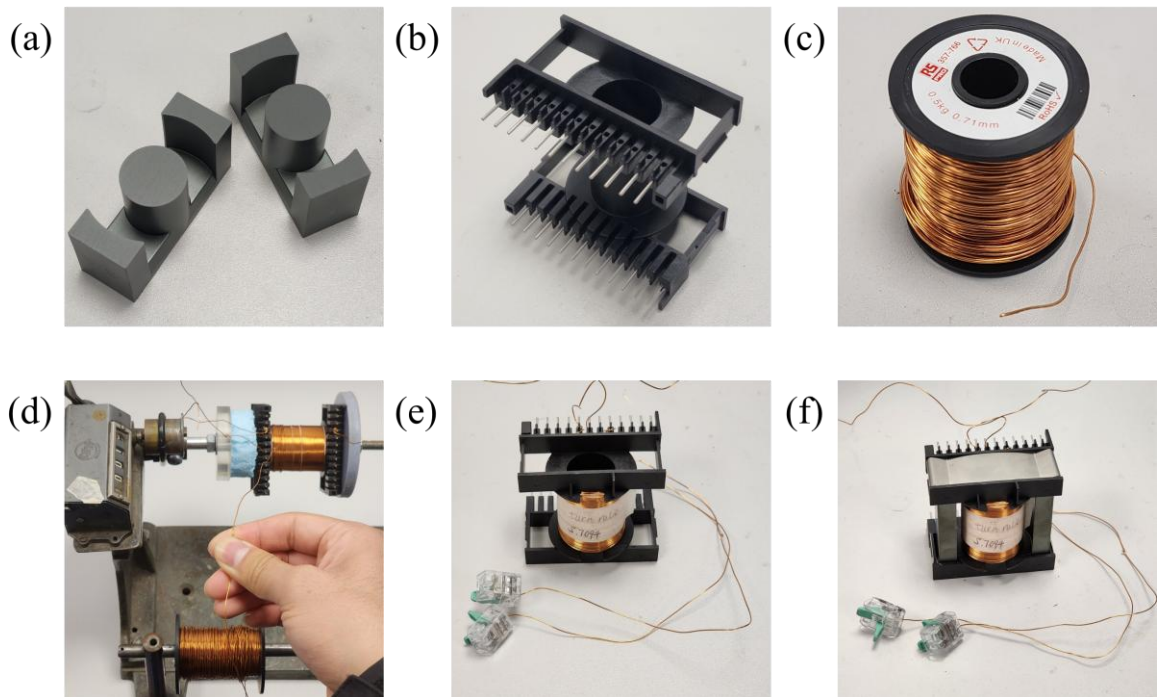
Flowchart for the fabrication of impedance matching transformer. (a) Transformer cores. (b) Transformer coil former. (c) Enamelled copper wire. (d) Manually winding copper coils. (e) The completed impedance reducing coil. (f) The fully assembled impedance matching transformer.
